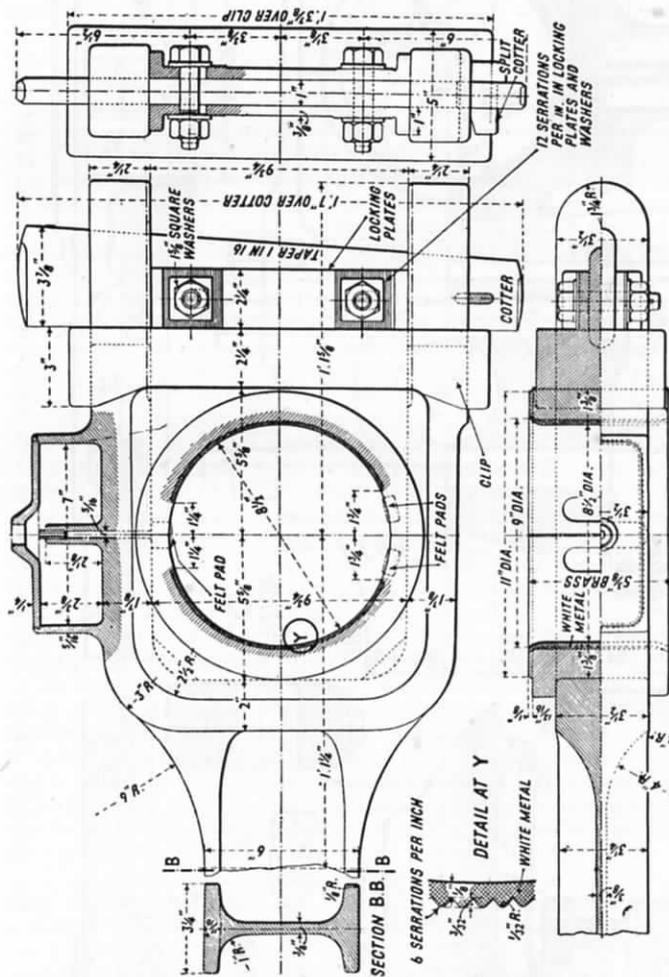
BIG END OF INSIDE CONNECTING ROD, 4-6-2 TYPE EXPRESS LOCOMOTIVE, L.M.S.R.
